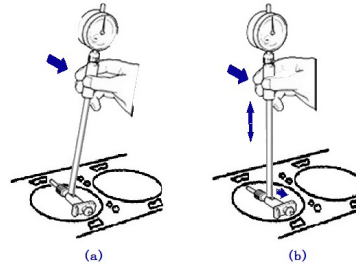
Correct method of inserting inner diameter gauge into cylinder
